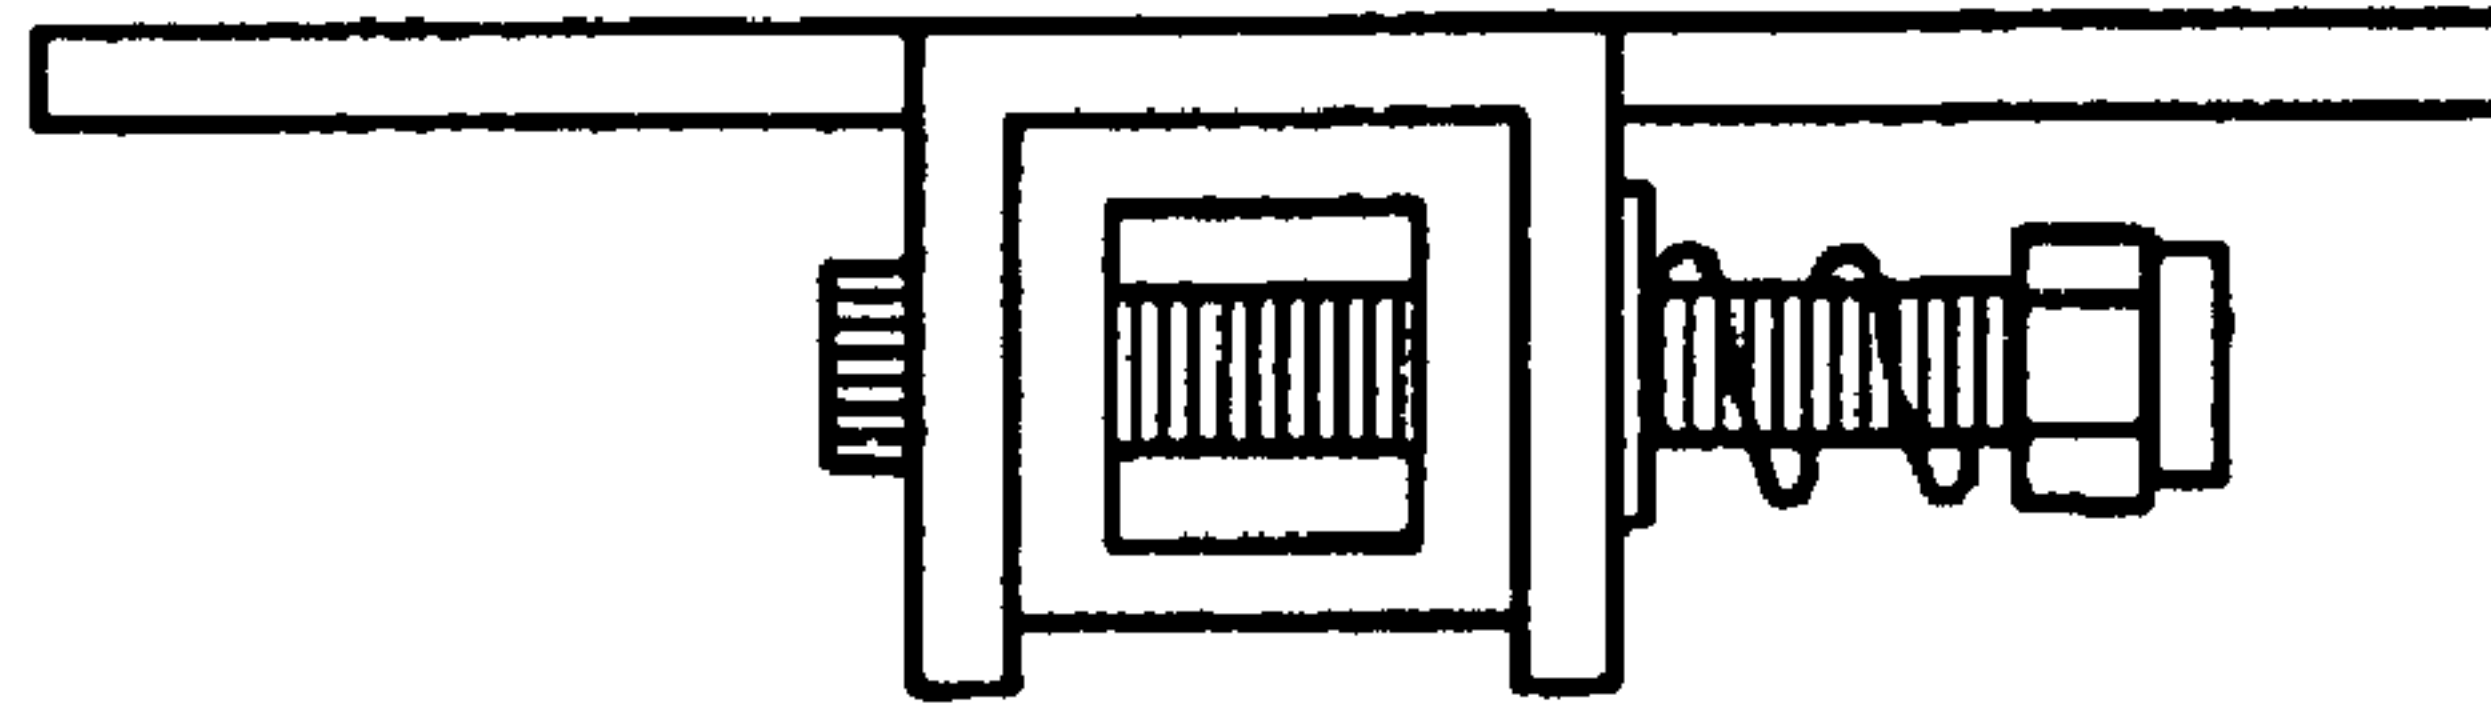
is a right side view of the invention with its arm in a locked up position.
